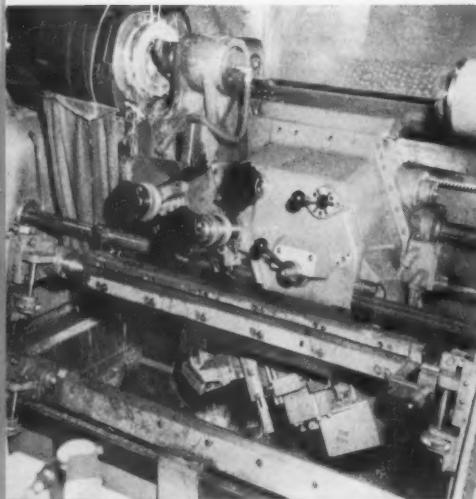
New Britain GF contour turning lathe set up to machine exhaust housings.
